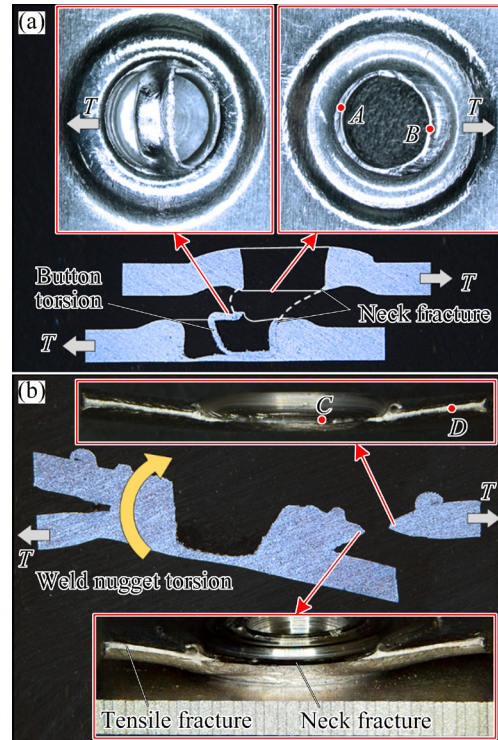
Shear tension fracture mode of joints: (a) Flat clinched joint; (b) Repaired joint
